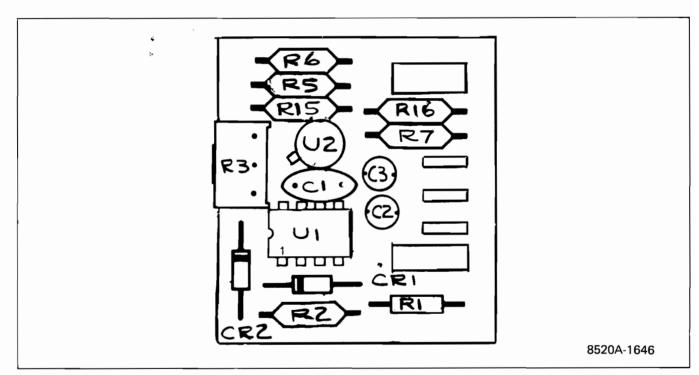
A. A3A1 Ref Amp PCB Assembly (Horizontal)
